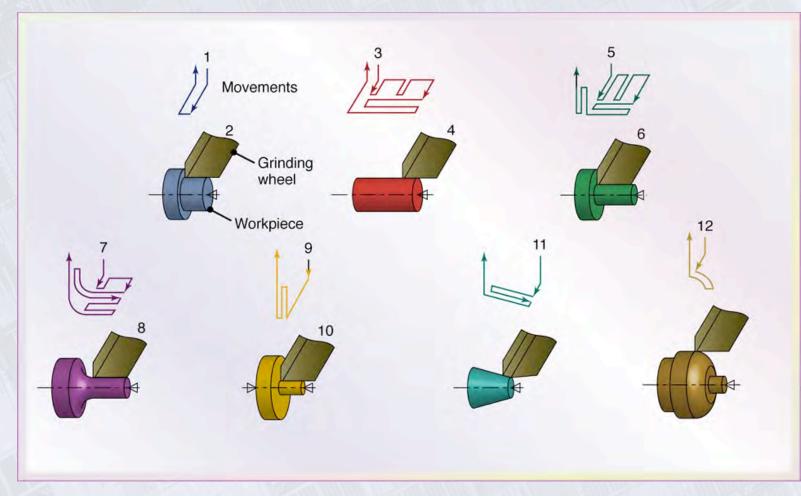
Cycle Patterns in Cylindrical Grinding
